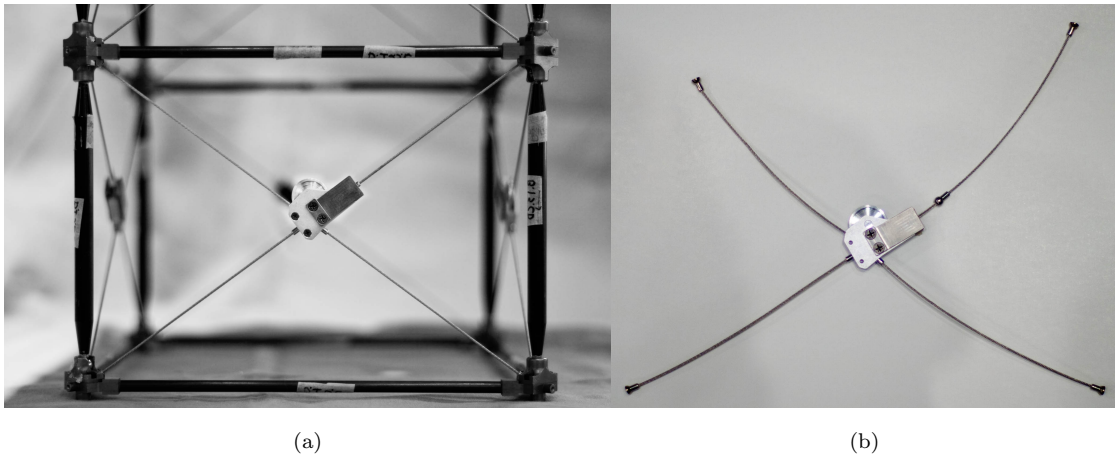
Closeup of an ADAM mast bay face (a) and cable assembly (b).
